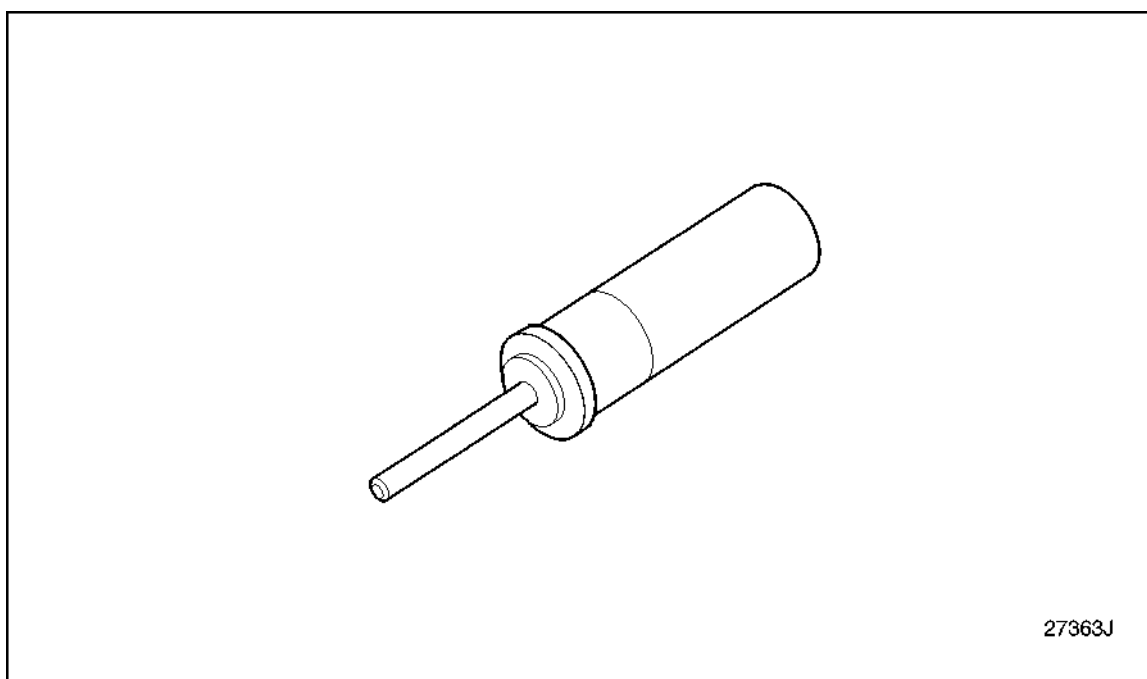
Valve Seat Installer, Exhaust,J 41822
